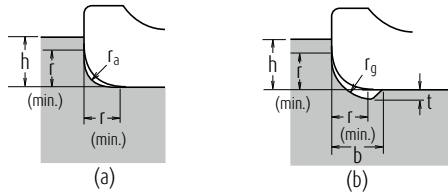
Chamfer Dimensions, Fillet Radius, and Shoulder Height
